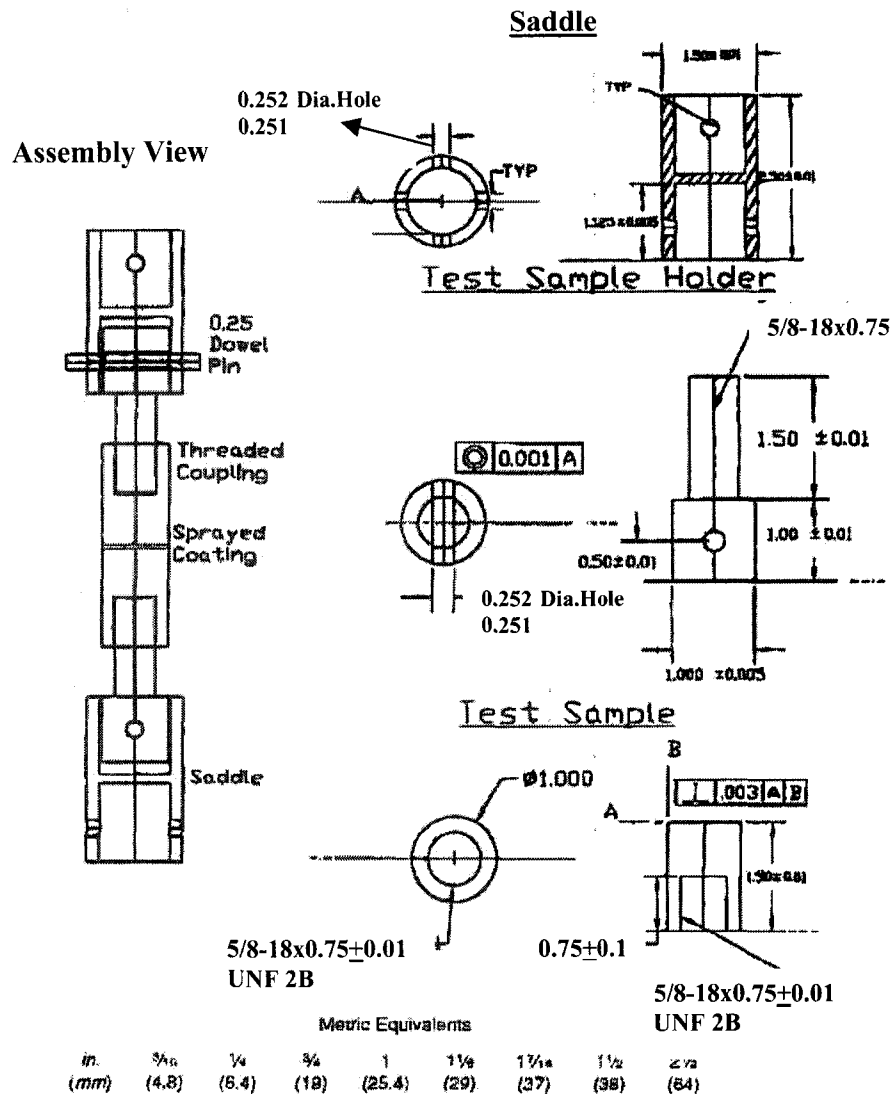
Self-Aligning Device and Test Assembly View (Ref. 26)
